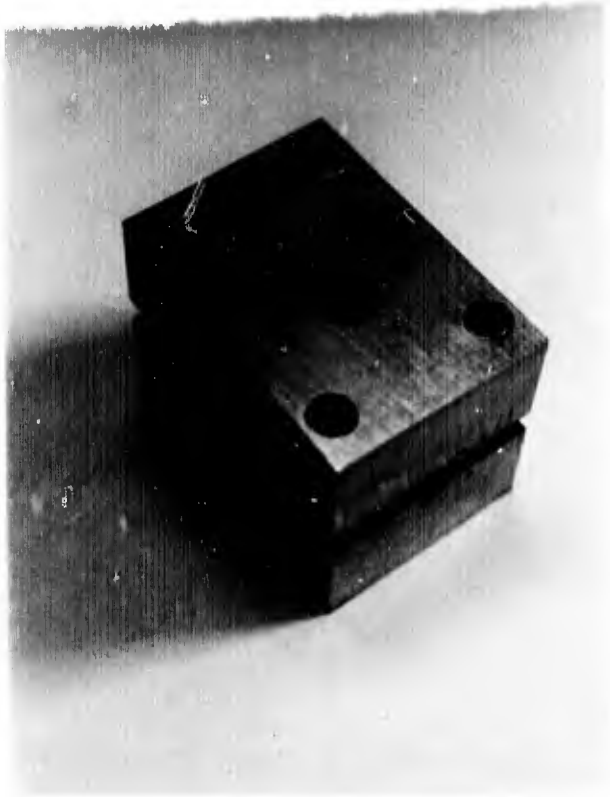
Holding fixture to prevent buckling and typical double necked specimen.
